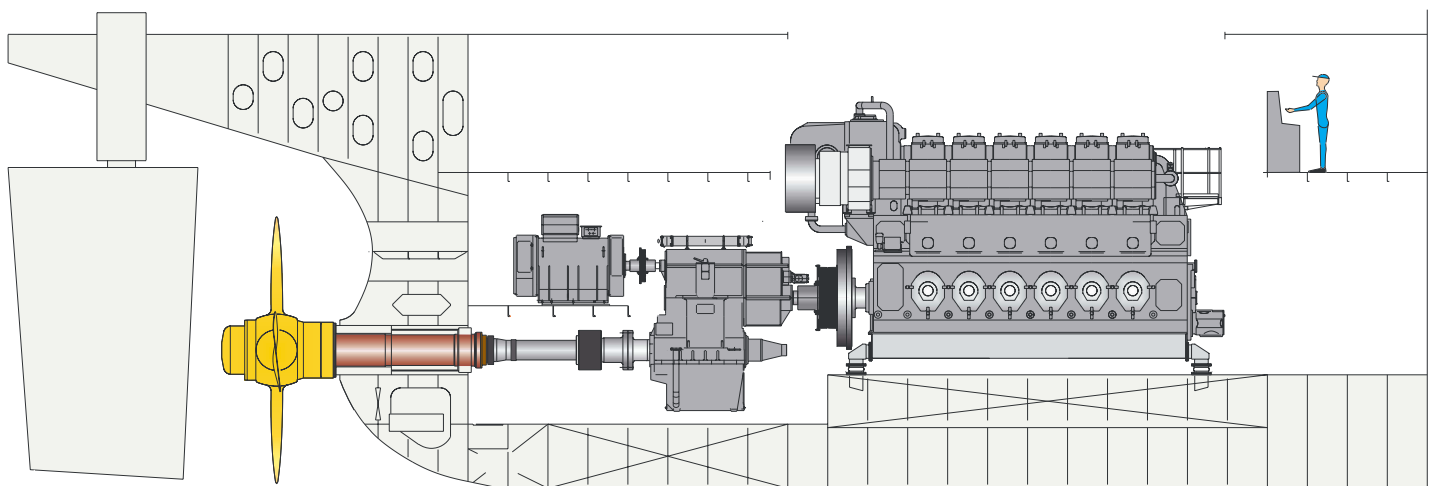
Propeller equipment type VBS - ODF (6L48/60B engine, reduction gear, VBS1380 propeller)
